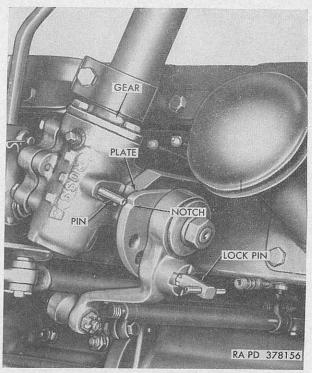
Position of steering gear, locking plate, and lockpin at final adjustment of steering system.
